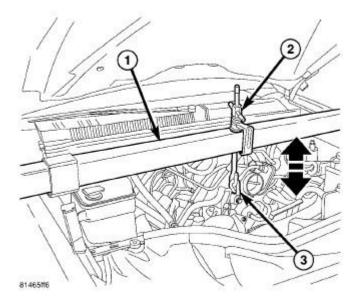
ENGINE SUPPORT TOOL Courtesy of CHRYSLER LLC
